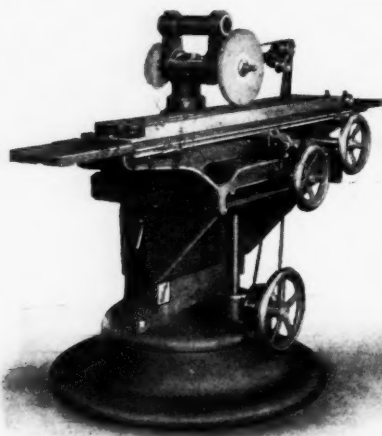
Thompson Grinder Arranged for Surface Grinding.
